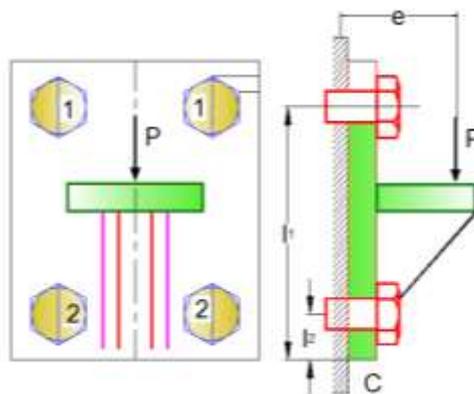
Eccentric load acting perpendicular to the plane of bolts
